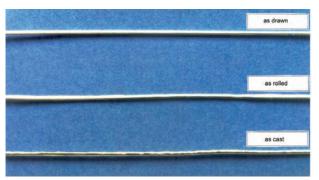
As cast stainless steel wire samples after dressing by cold rolling or drawing.
